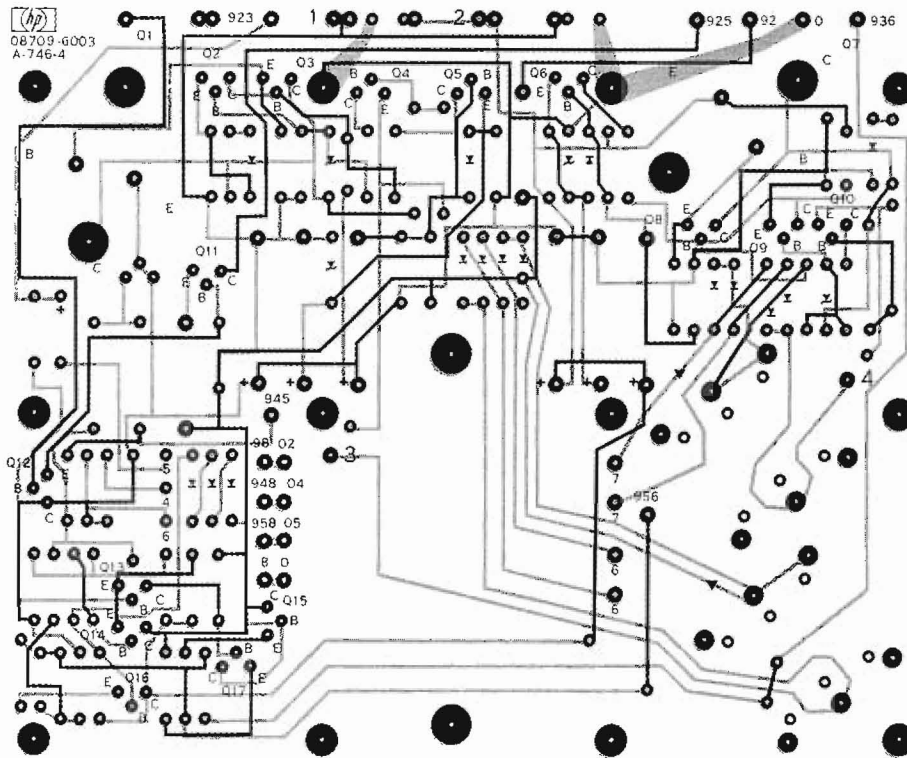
A1 Power Supply/Amplifier Board Assembly
